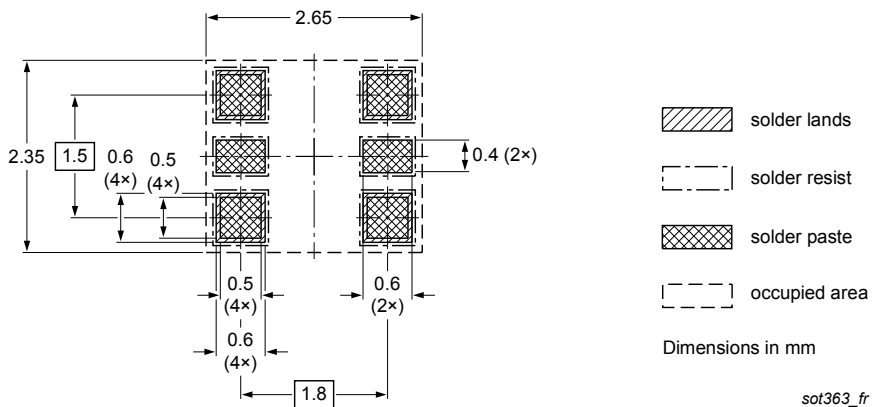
Reflow soldering footprint for TSSOP6 (SOT363)
